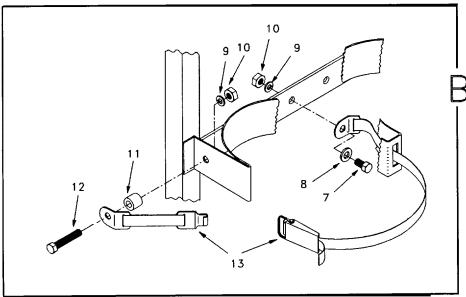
HAND TRUCK ASSEMBLY (CA033) (2 of 2)
